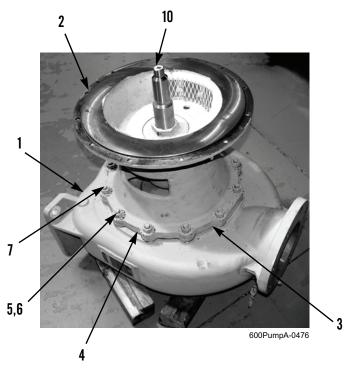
Installing Intermediate Housing and Seal Plate on Pump Casing.
